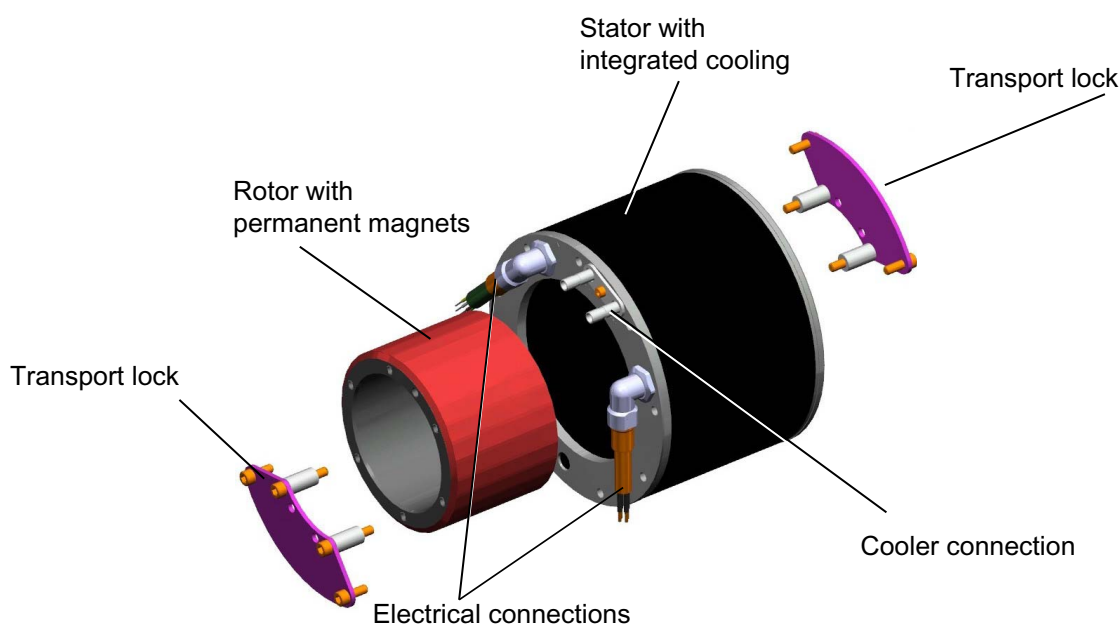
1FW605 and 1FW606 motor components with integrated cooling (1 cooling circuit)
